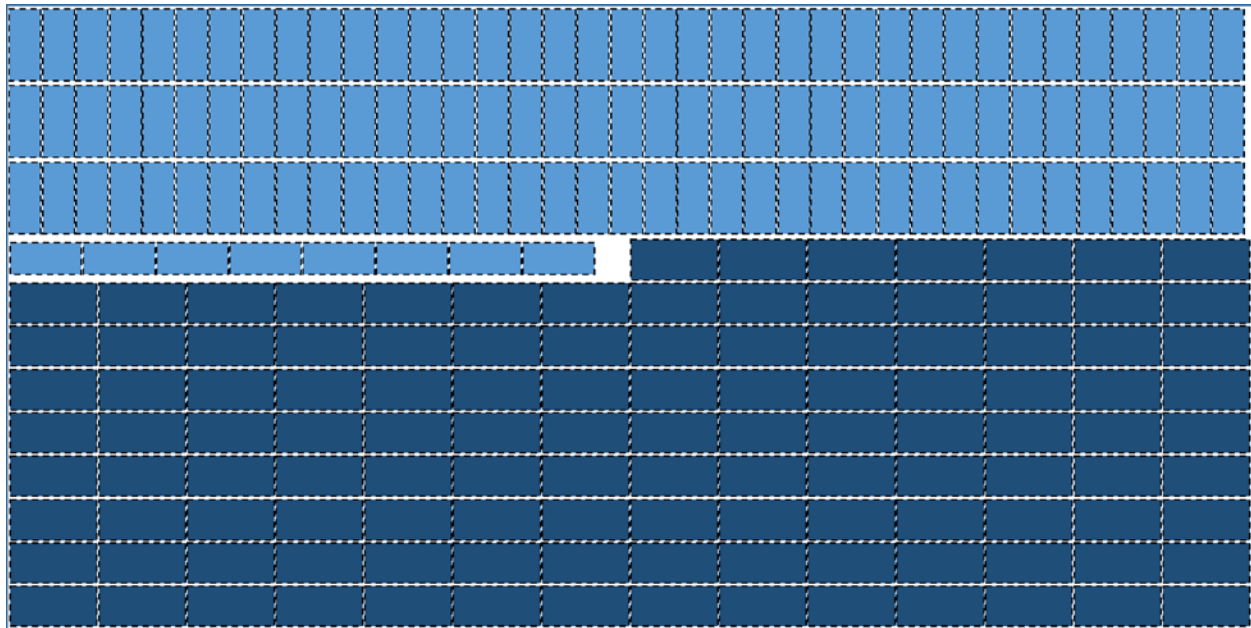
Mock layout of Kydex sheet with cuts for outer (light blue) and inner (dark blue) pieces marked
